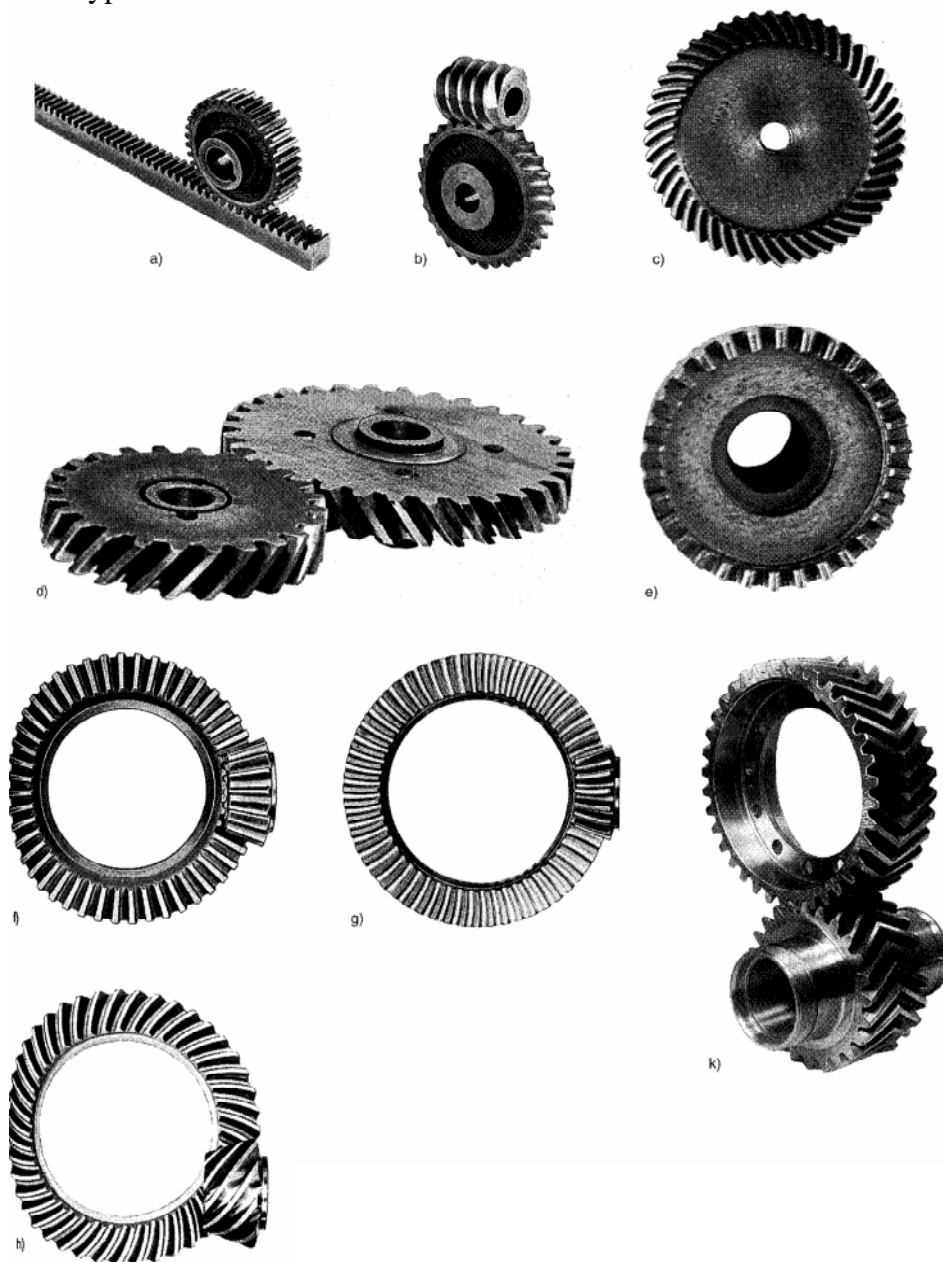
Types of gears: a) spur gear and rack; b) worm and worm gear; c) spiral bevel gear; d) helical gears; e) crown gear; f) straight bevel gears; g) zerol bevel gear; h) hypoid bevel gear; k) continuous herringbone gears
